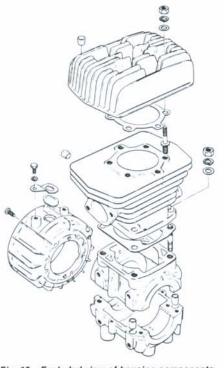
Exploded view of housing components and associated parts used in single cylinder engine.
